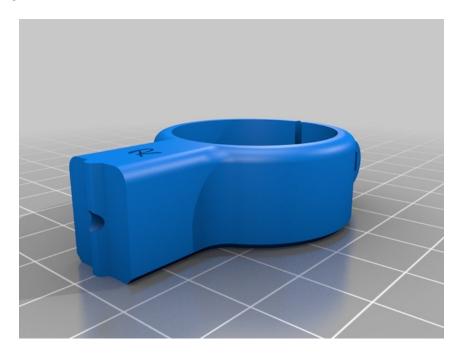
Gimbal Motor Frame 2 (Courtesy: www.thingiverse.com/thing:1247236)
